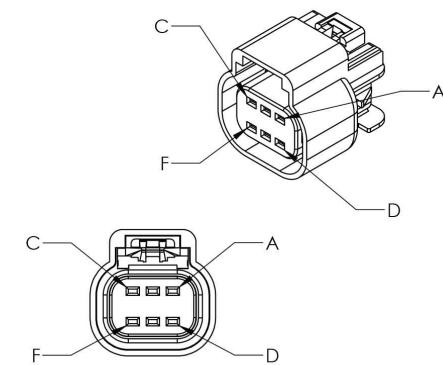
ACCELERATOR PEDAL & DBW THROTTLE BODY
